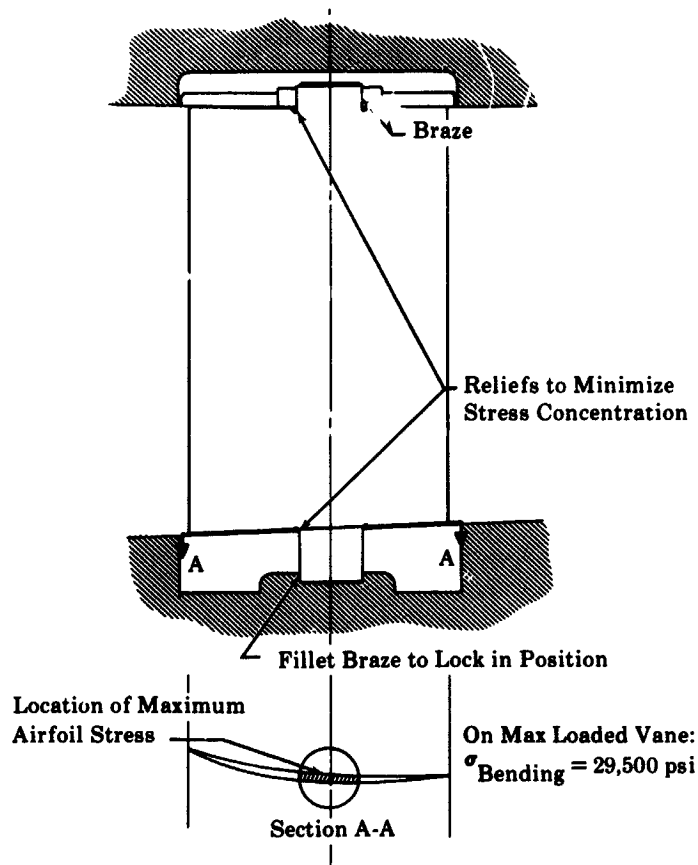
Typical Inlet Guide Vane/Stator Assembly
